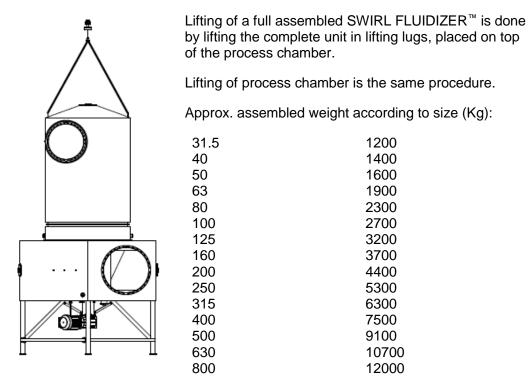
Lifting of a full assembled SWIRL FLUIDIZER[™]
